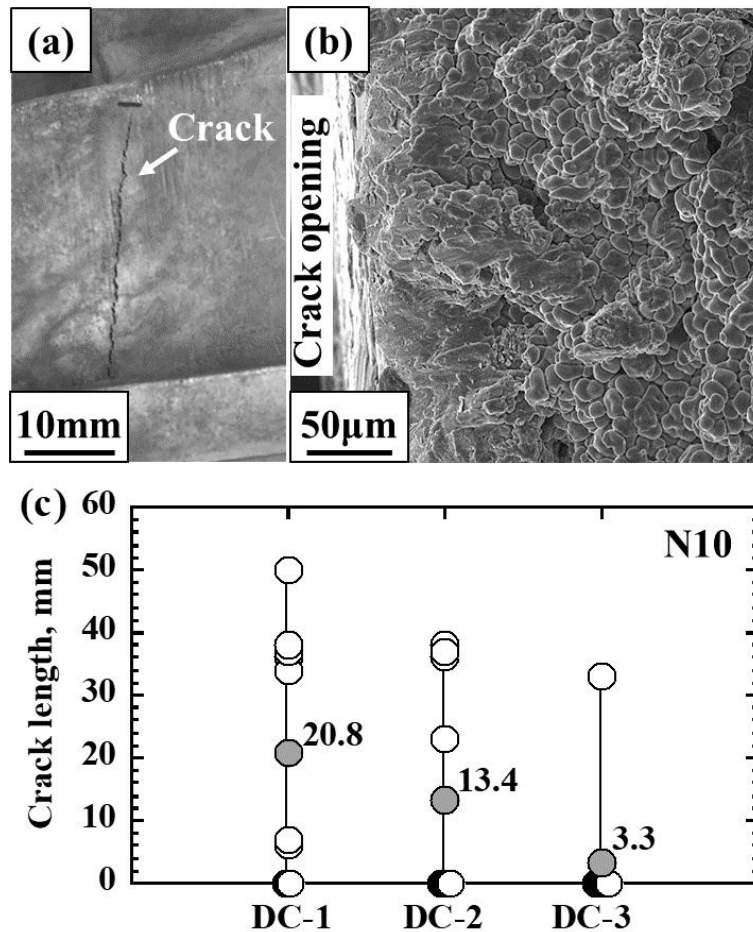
(a) Image of hot tearing occurred at point A of lower link arm die castings, (b) SEM image of hot tearing fracture surface, (c) Effect of alloy compositions on crack length of lower link arm die castings.
